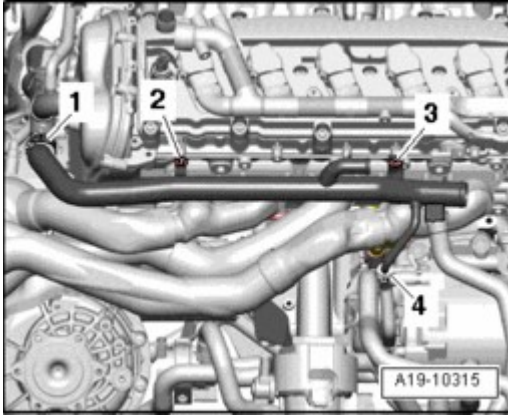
Removing Bolts, Loosening Hose Clamps And Removing Right Coolant Pipe From Coolant Hoses
